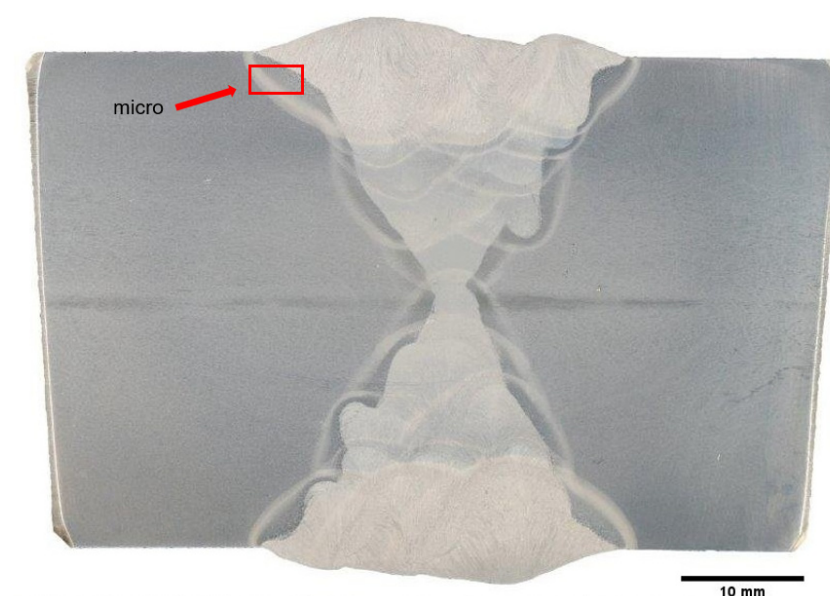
X-welded joint cross-sectional macroscopic image. Cycle E: As-Welded (AW) condition.
